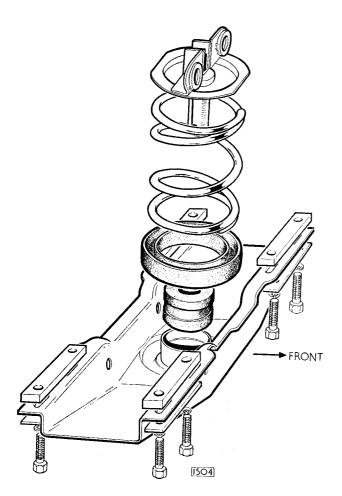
Exploded view of the rear mounting assembly (standard transmission and overdrive models).
